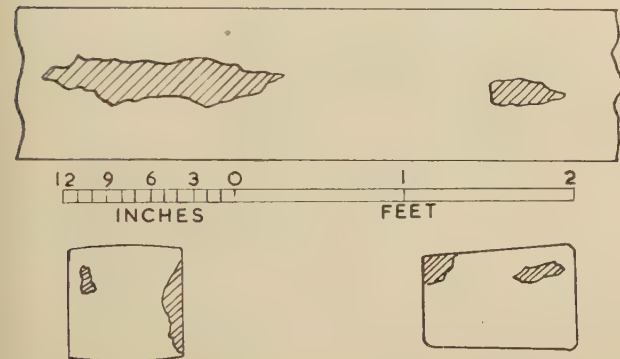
Typical failures of tracks and rollers owing to spalling
